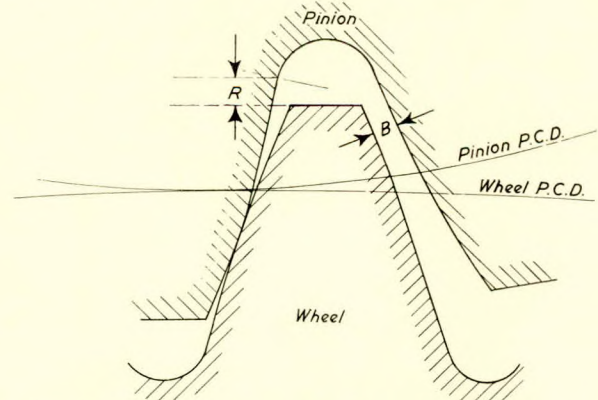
Radial clearance available between tip of tooth and root radius of meshing gears
